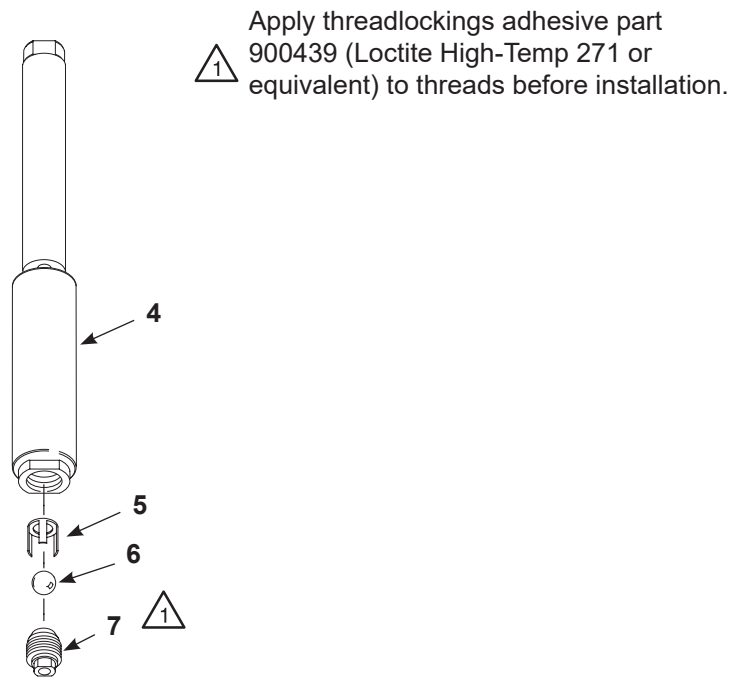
Plunger Disassembly (Step 8) and Assembly
